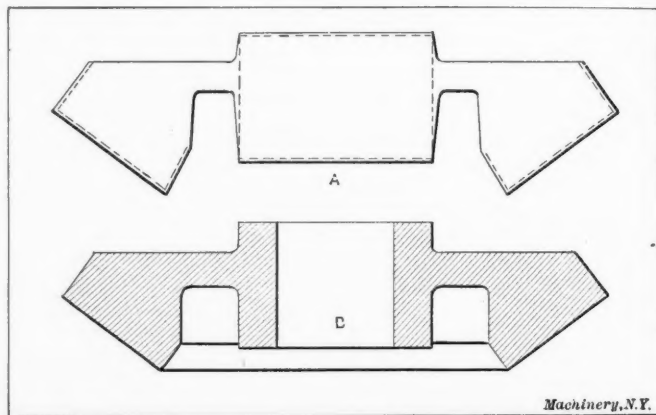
Templet with Shrinkage, Draft and Finish Allowances added, used in turning out the Impression in a Die for a Bevel Gear Blank. B shows the Finished Gear Forging after being machined
